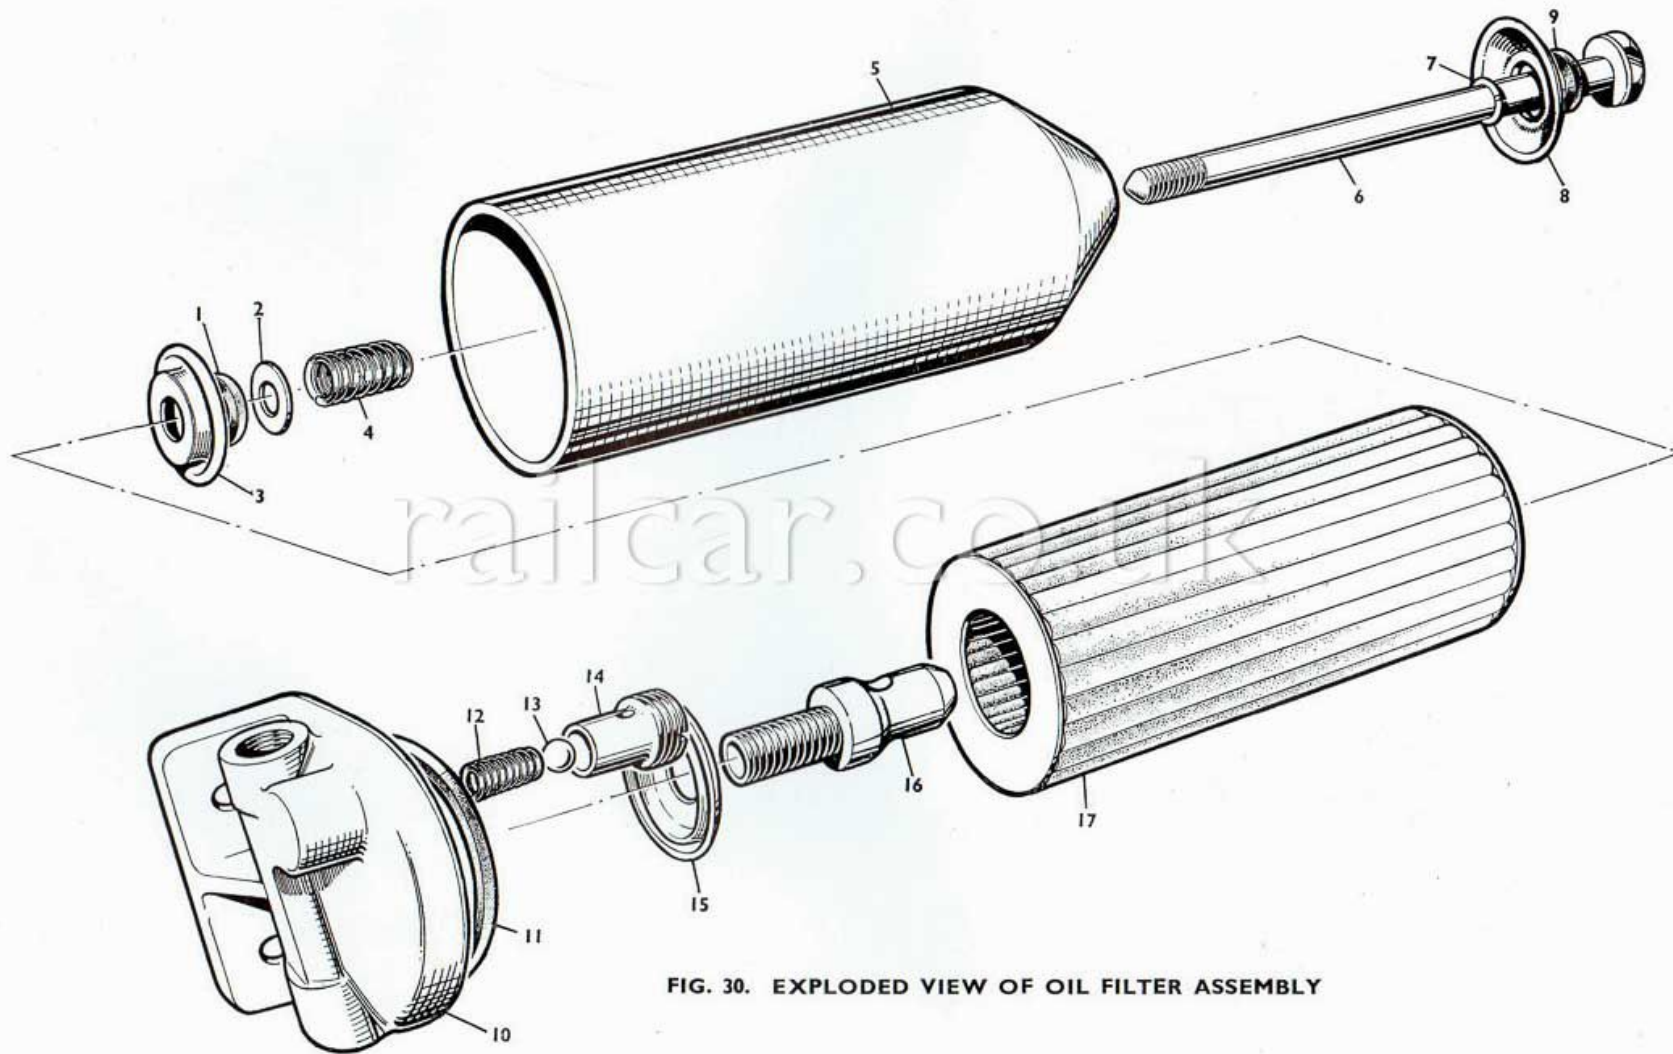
EXPLODED VIEW OF OIL FILTER ASSEMBLY
